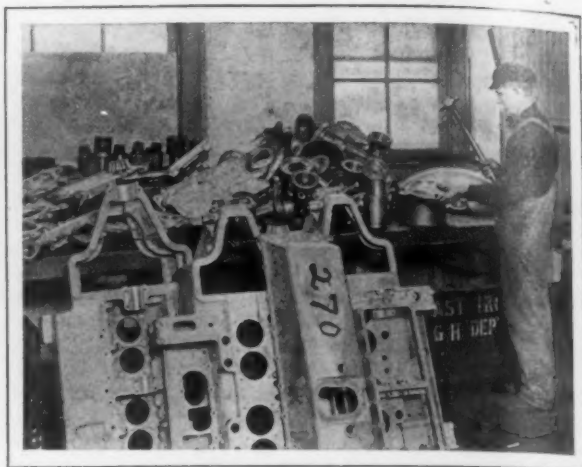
An Example Indicating the Extent to Which Parts Failing to Meet the Rigid Inspection Are Condemned
